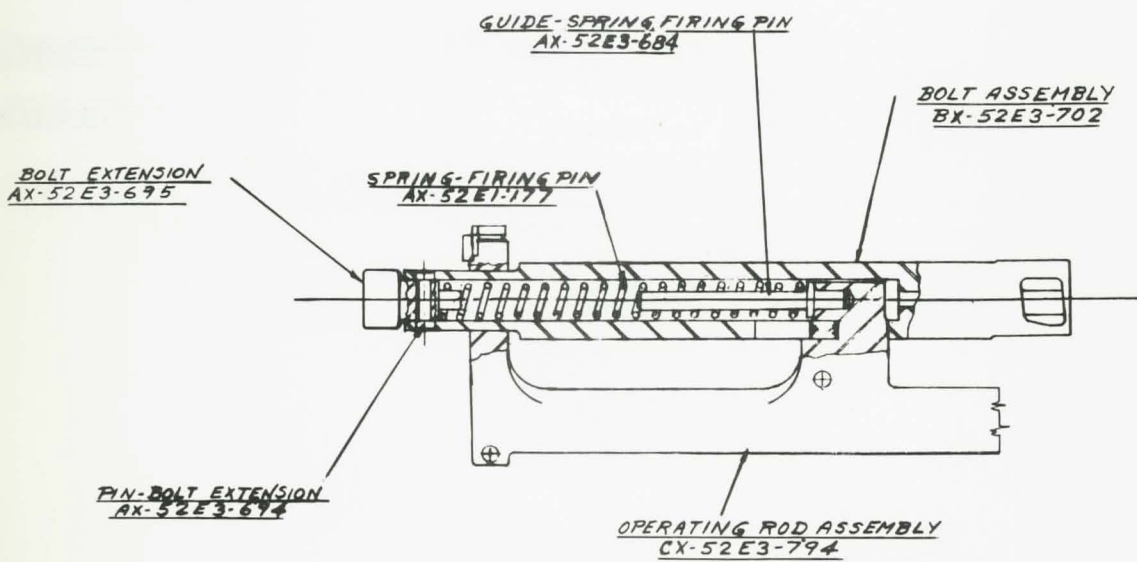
OPERATING ROD AND BOLT ASSEMBLY
